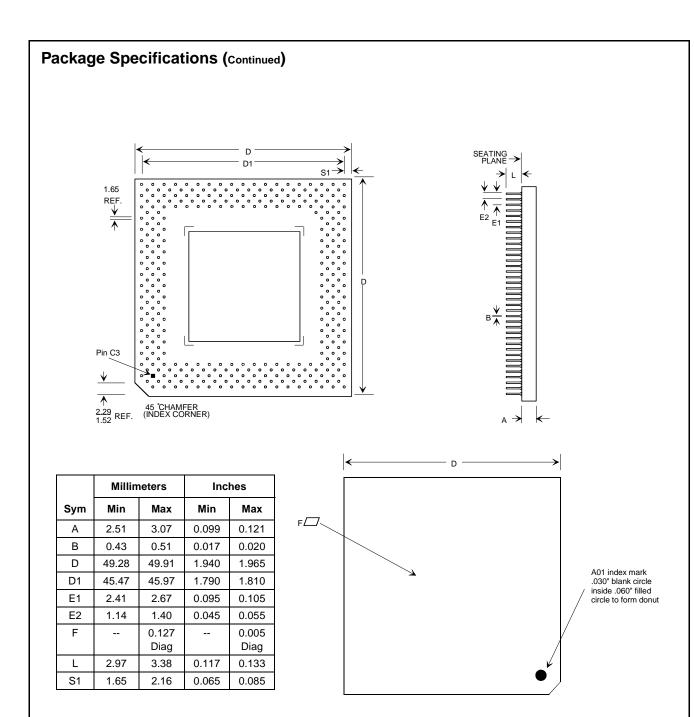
320-Pin SPGA Mechanical Package Outline
